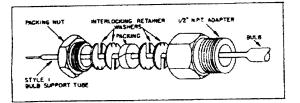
Port Number 442-638 packing nut assembly. (Use with Style 1 bulb with support tube for direct immersion application.) For closed tank applications without well assembly, Part 442-638 packing nut assembly may be supplied; see Figure 4 for sequence of installation. Place parts over support tube section of the element, placing bulb into tank (be sure tank is first drained so liquid level is below tank opening). Screw packing nut into adapter with the retaining washers and packing in place as shown.
